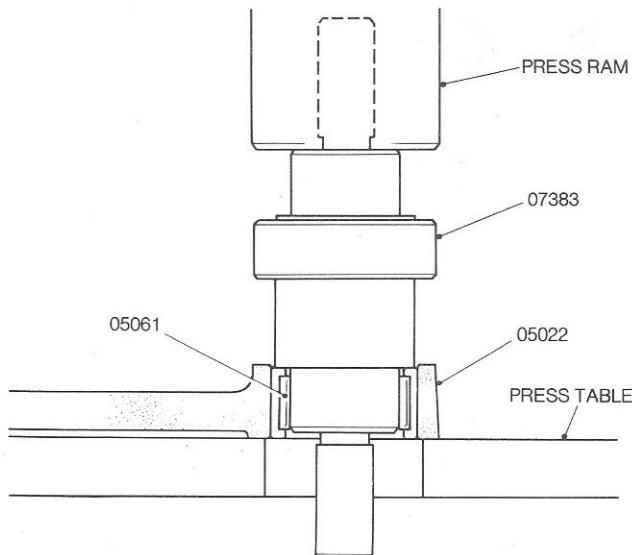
Removing the Connecting Rod Needle Roller Bearing
